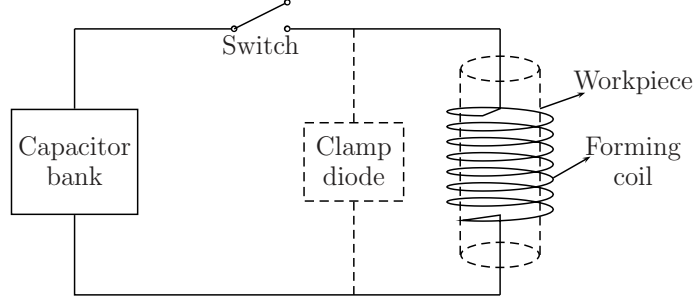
Electromagnetic forming system for compression (shrinking) of hollow cylindrical workpieces.
